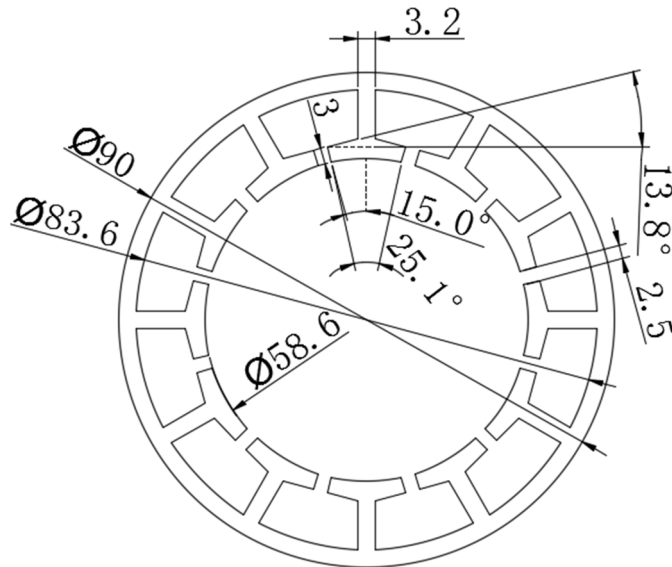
12-slot stator dimensions for SPM-FRPM machines.
